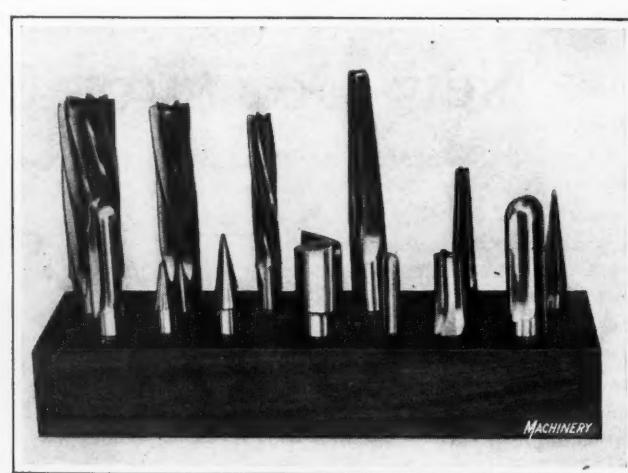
Typical Collection of Tools which are used in Die-sinking Machine
